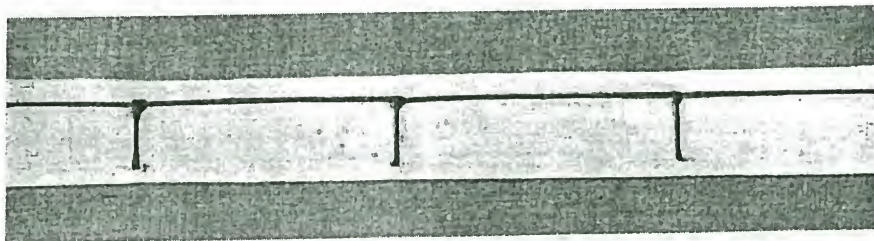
FABRIC STRUNG (SHOWING KNOTTED SIDE) TO RIB
